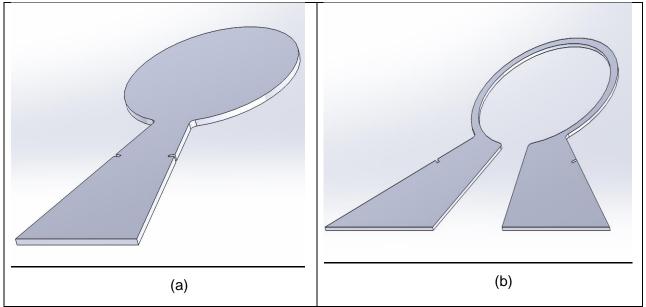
(a) Inner Wire Mold (b) Outer Wire Mold
